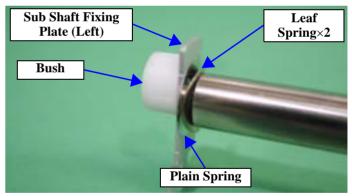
Order on Left End of Carriage Guide Shaft B
